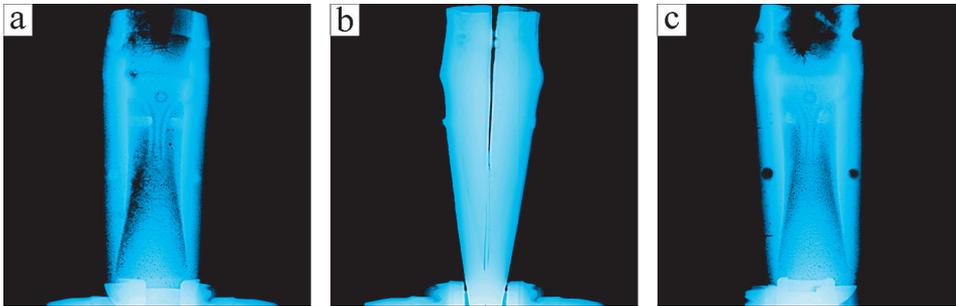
The X-ray images of the casting mould from Elgiszewo.
